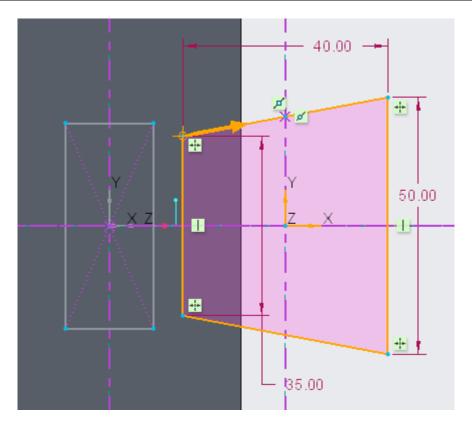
Sketch for Section 2. Notice the symmetry (centerline!) and mid-point constraints. Now we have two cross-sections defined, three to go. Create Section 3 to PNT0 (Figure 40) and Section 4 to PNT1 (Figure 41).
